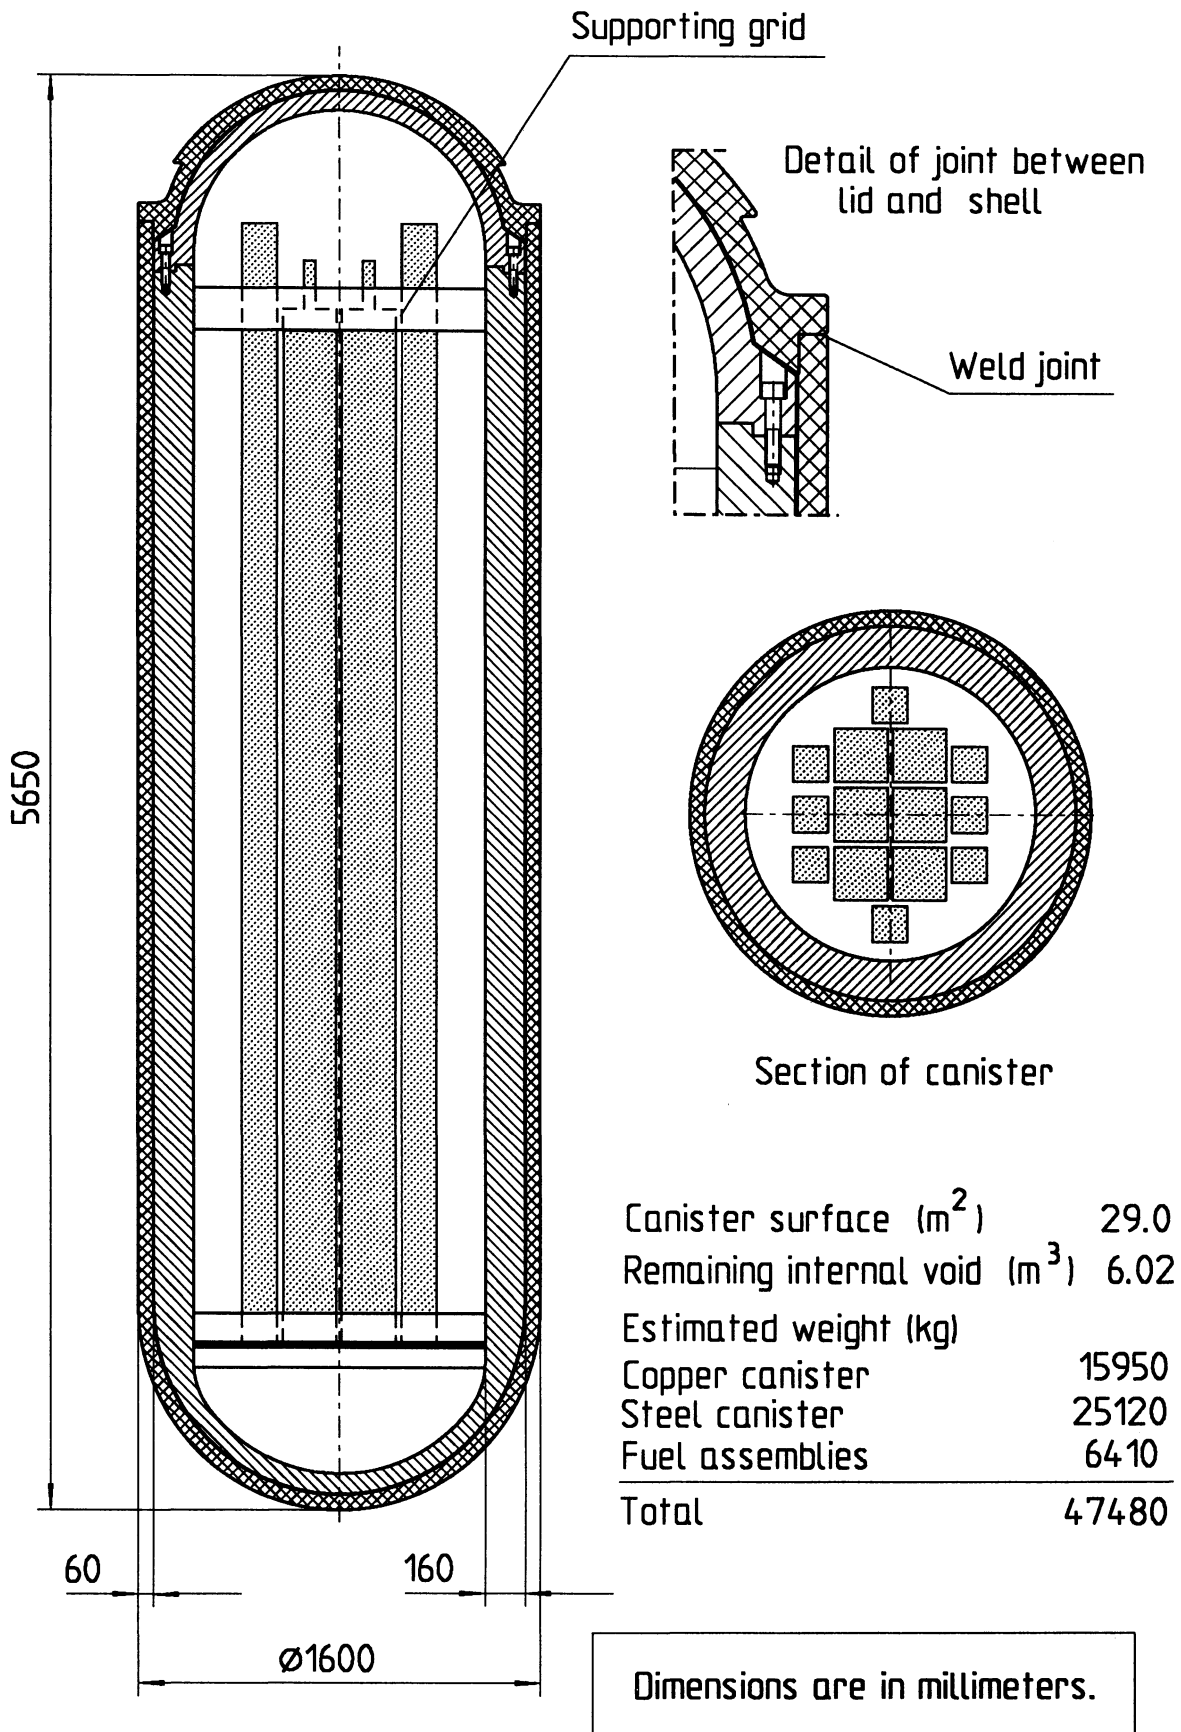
Copper/steel canister with hemispherical ends, PWR assemblies.
